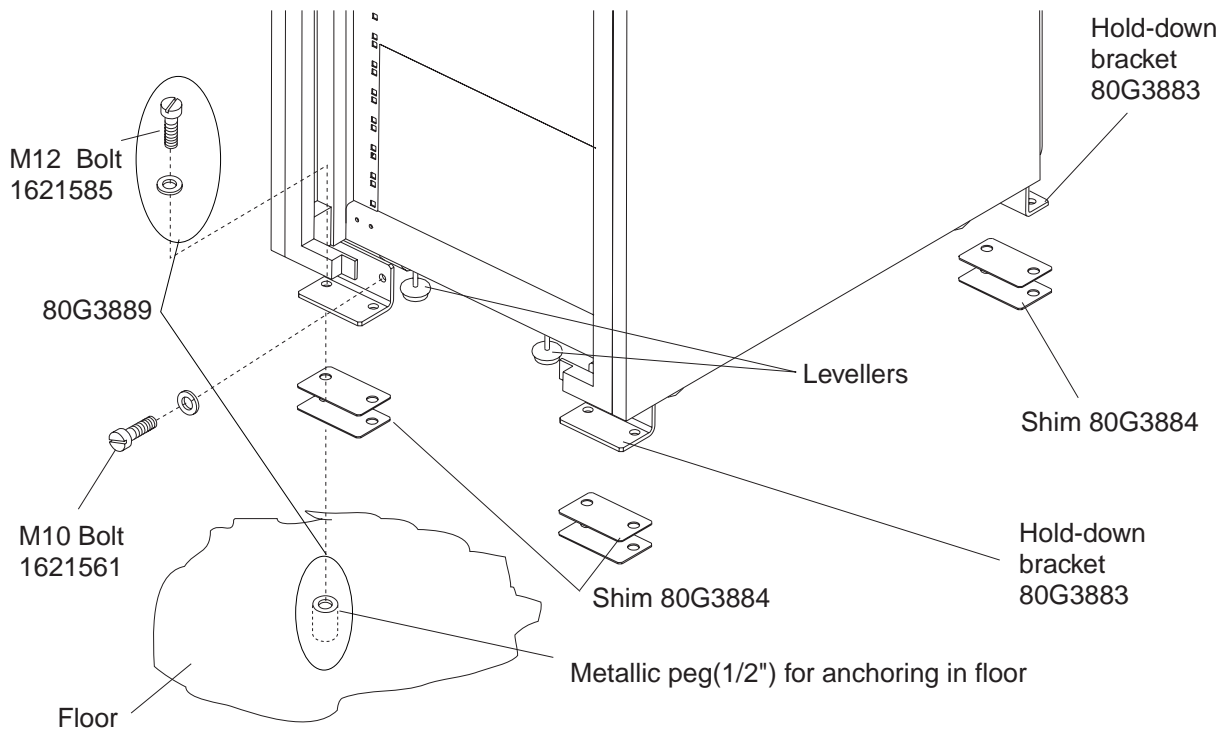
Installing a 37 U Rack Machine on a Floor (Rear Side)
